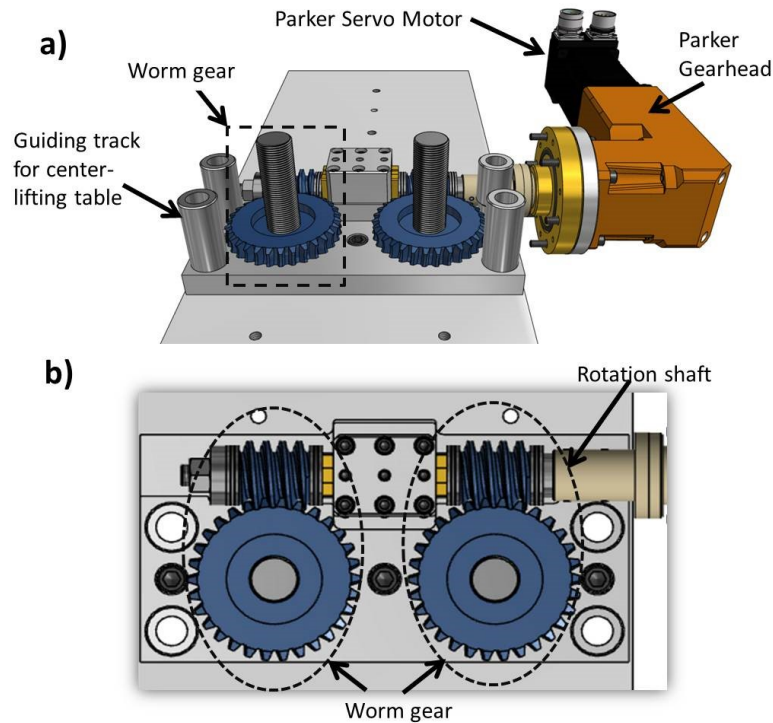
a) Driving system and transmission system of GeoCDM b) top view of the worm gears and the rotation shaft.
